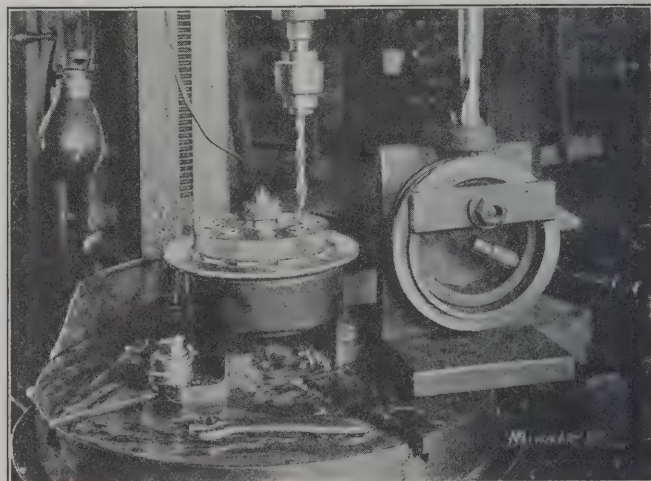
Drilling the Three Oil Supply Holes in the Case (see Fixture at the Right), and Drilling the Bolt and Pivot Holes in the Cover
